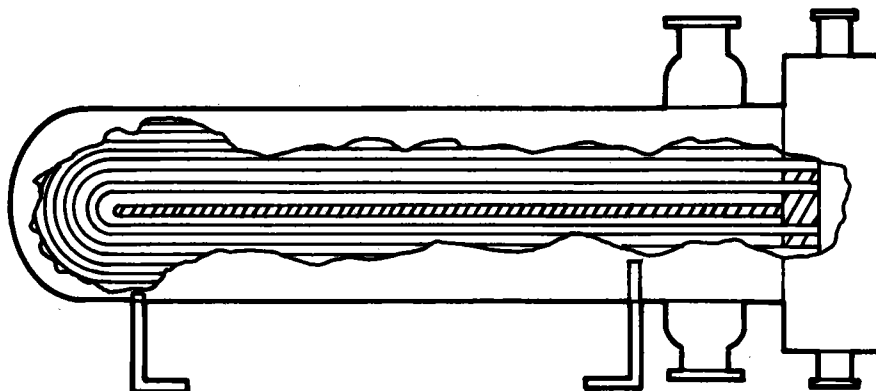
Typical Two-Shell Pass, U-Tube Heat Exchanger With Removable Tube Bundle
